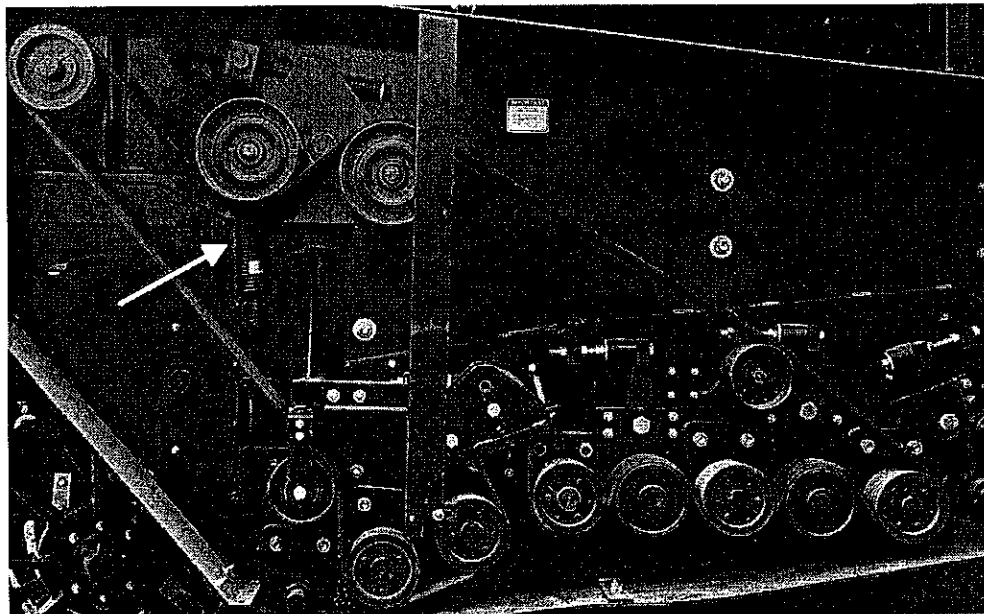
Left-Hand Drive Mechanism (Shields Removed For Clarity); Arrow Shows Assist Spring (Left-Hand Drive Only)
